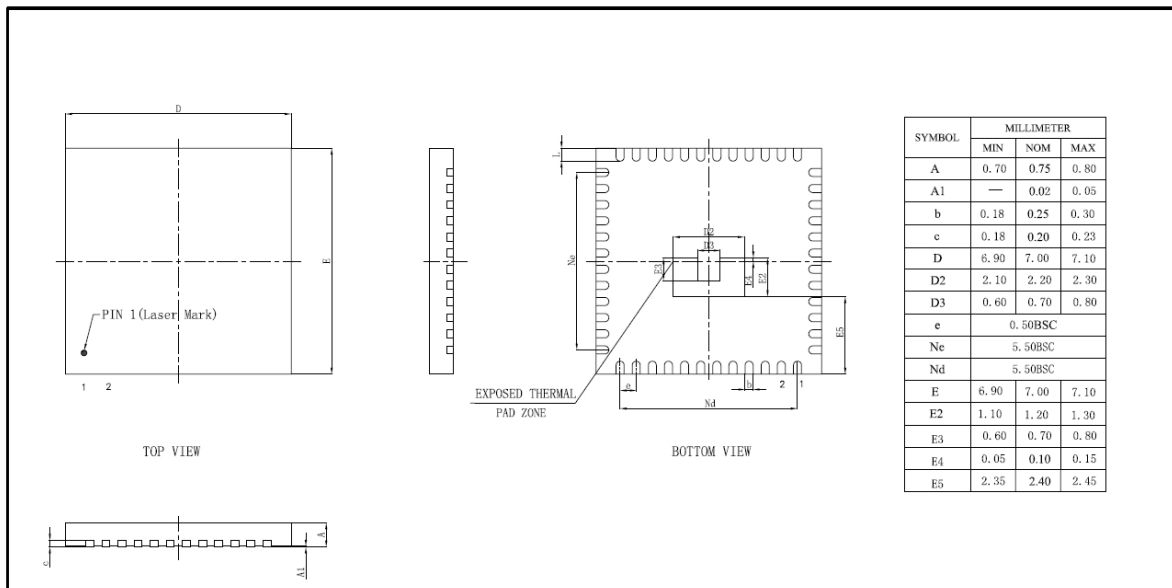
ICN6201 QFN48 pin with special shape e-pad dimension
